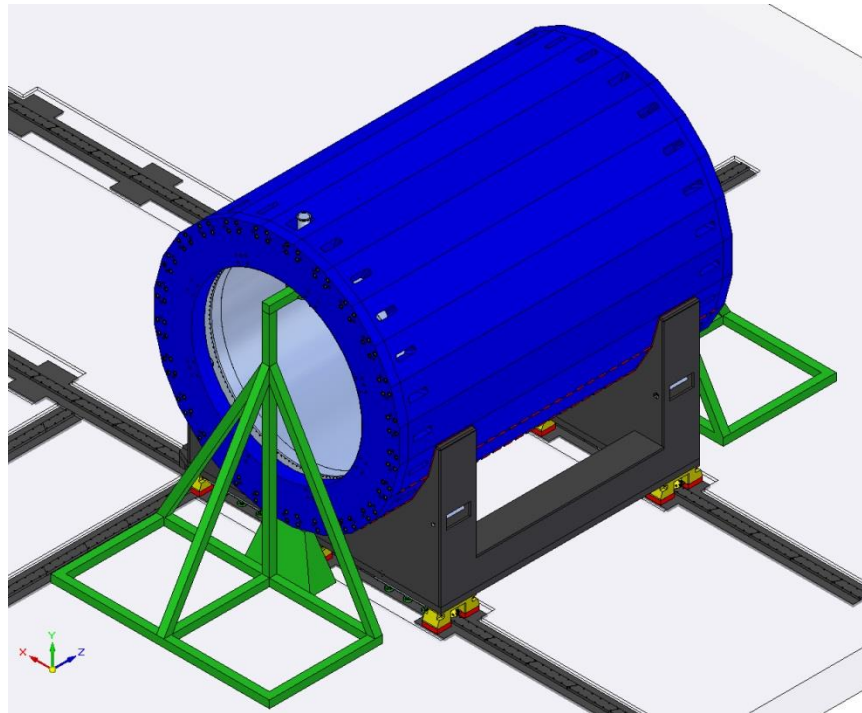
Mounting of the remaining yoke beams after the mounting of the cryostat
